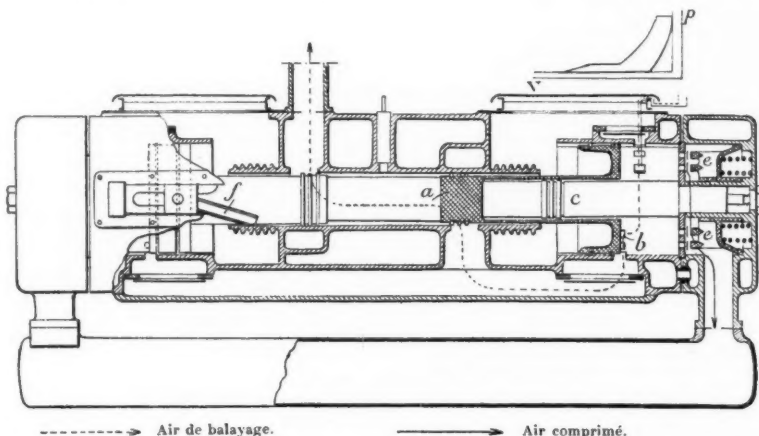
PARTIAL LONGITUDINAL SECTION OF THE PESCARA AUTO-COMPRESSOR
